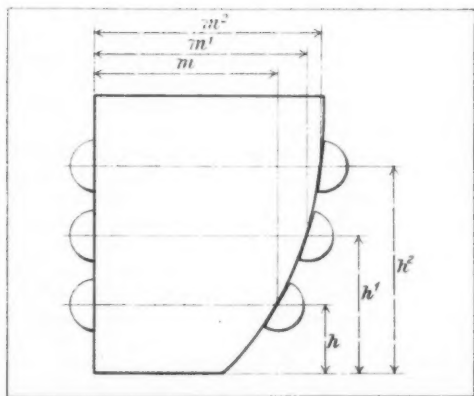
Micyl Blocks may be Employed for Checking the Ordinate Dimensions of a Curved Form, such as a Cam Plate
